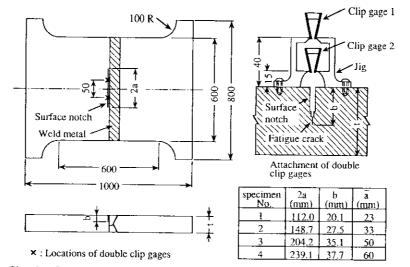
Geometry of surface notched, wide plate tensile test specimen
